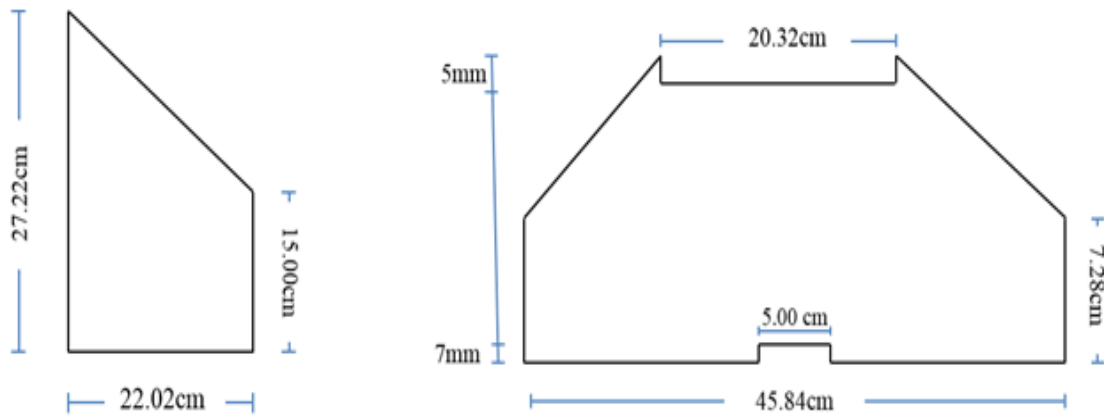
Dimensions and shape of two pieces of the Aluminum base.
